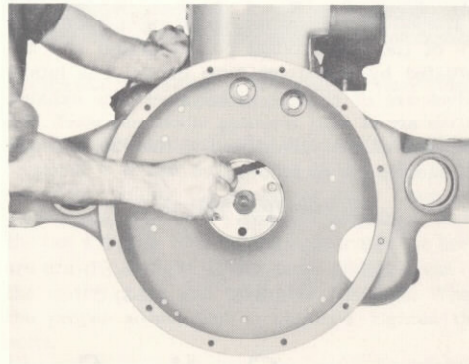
Illustration No. 13—Method of Obtaining Clearance Between Crankshaft Flange and Fly-Wheel Housing
